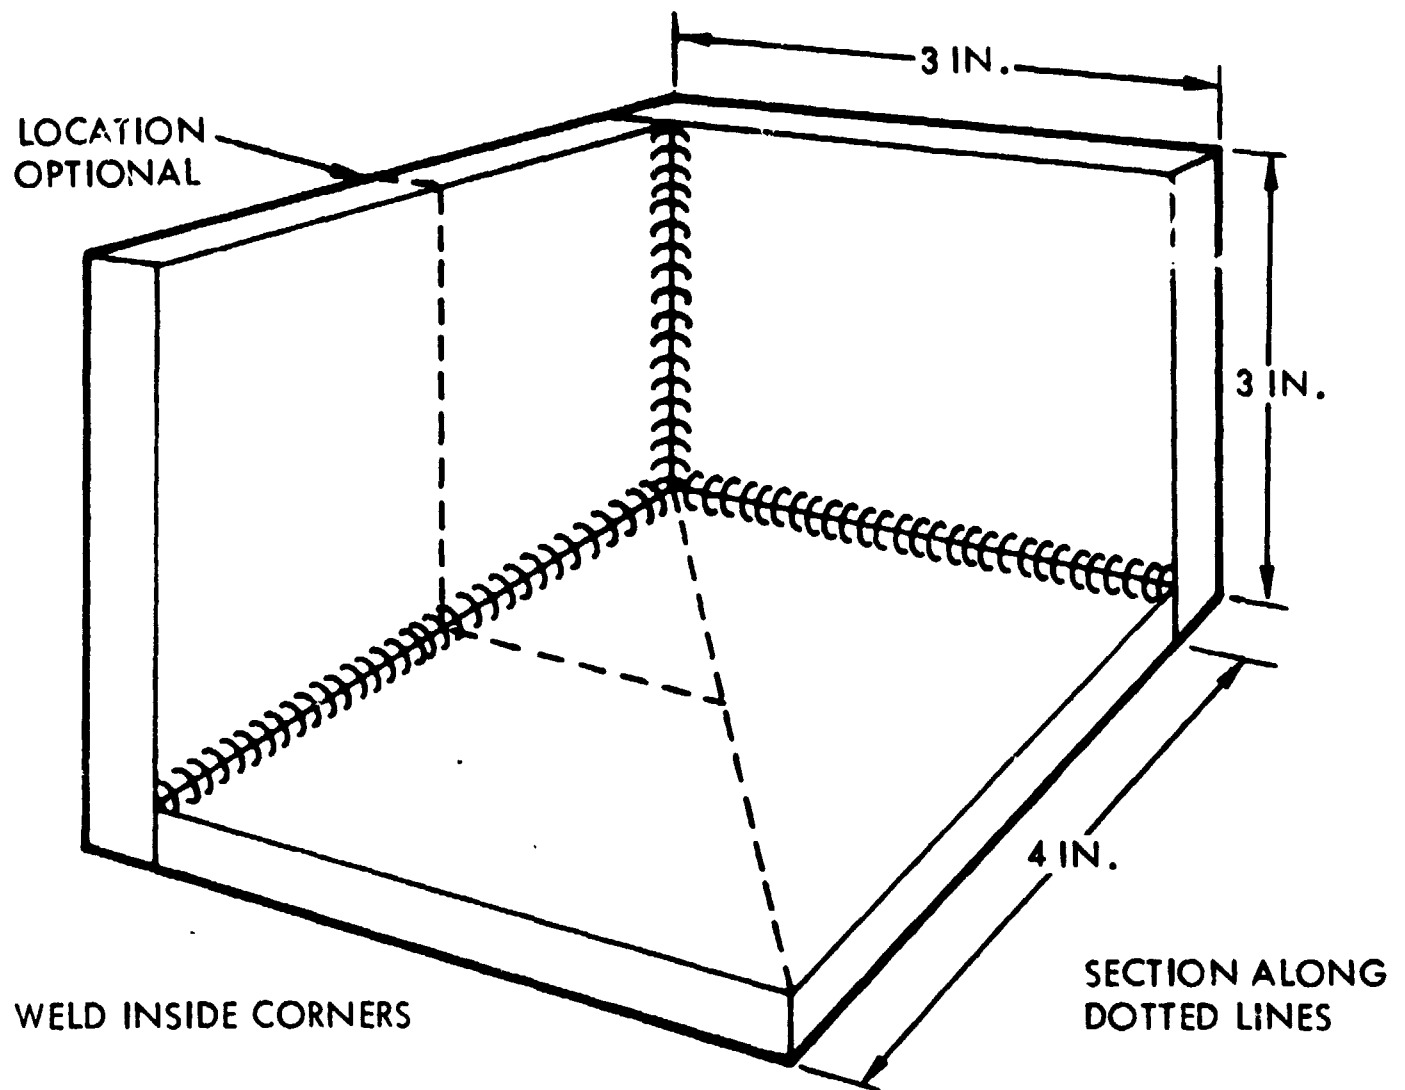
Box-Weld Joint Specimen (Manual)
